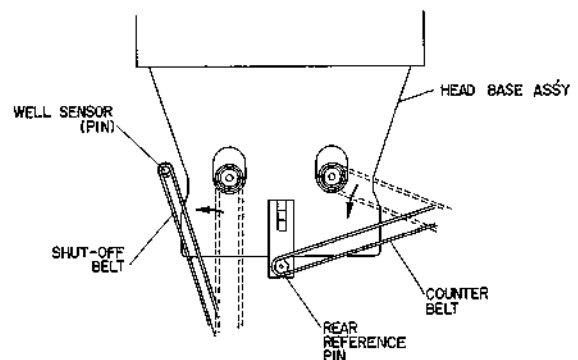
Ball Drive Mechanism Ass'y Replacement
